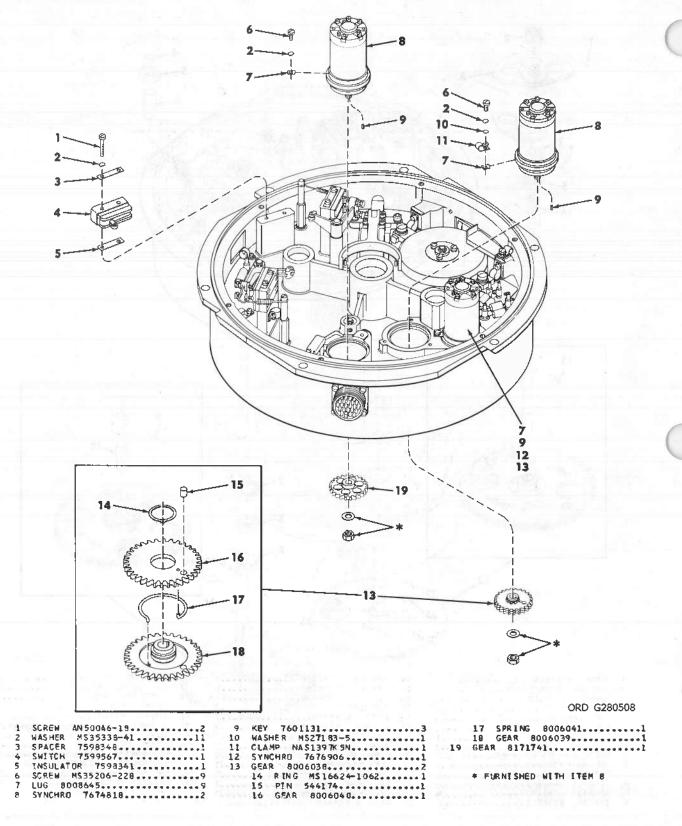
TRANSMITTER, POSITION, GUIDED MISSILE /9007947/-PARTIAL EXPLODED VIEW
